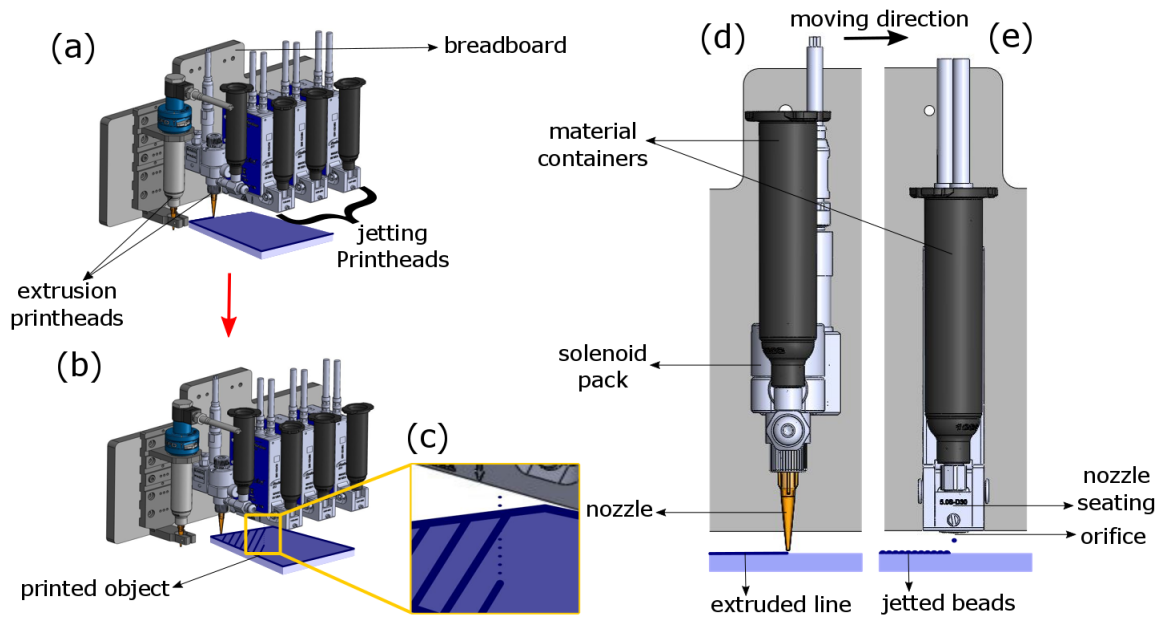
The working principle of the hybrid AM technique for printing of silicone; (a) The solenoid-controlled pneumatic printhead is forming the frame of a layer by extruding a continuous stream of silicone; (b) The PPJ printhead is filling the layer at a fast rate based on the program; (c) A magnified view of the PPJ of silicone showing the stream of droplets; (d) The front view of the material extrusion system; (e) The front view of the material jetting system demonstrating how the silicone beads form up a solid line.
